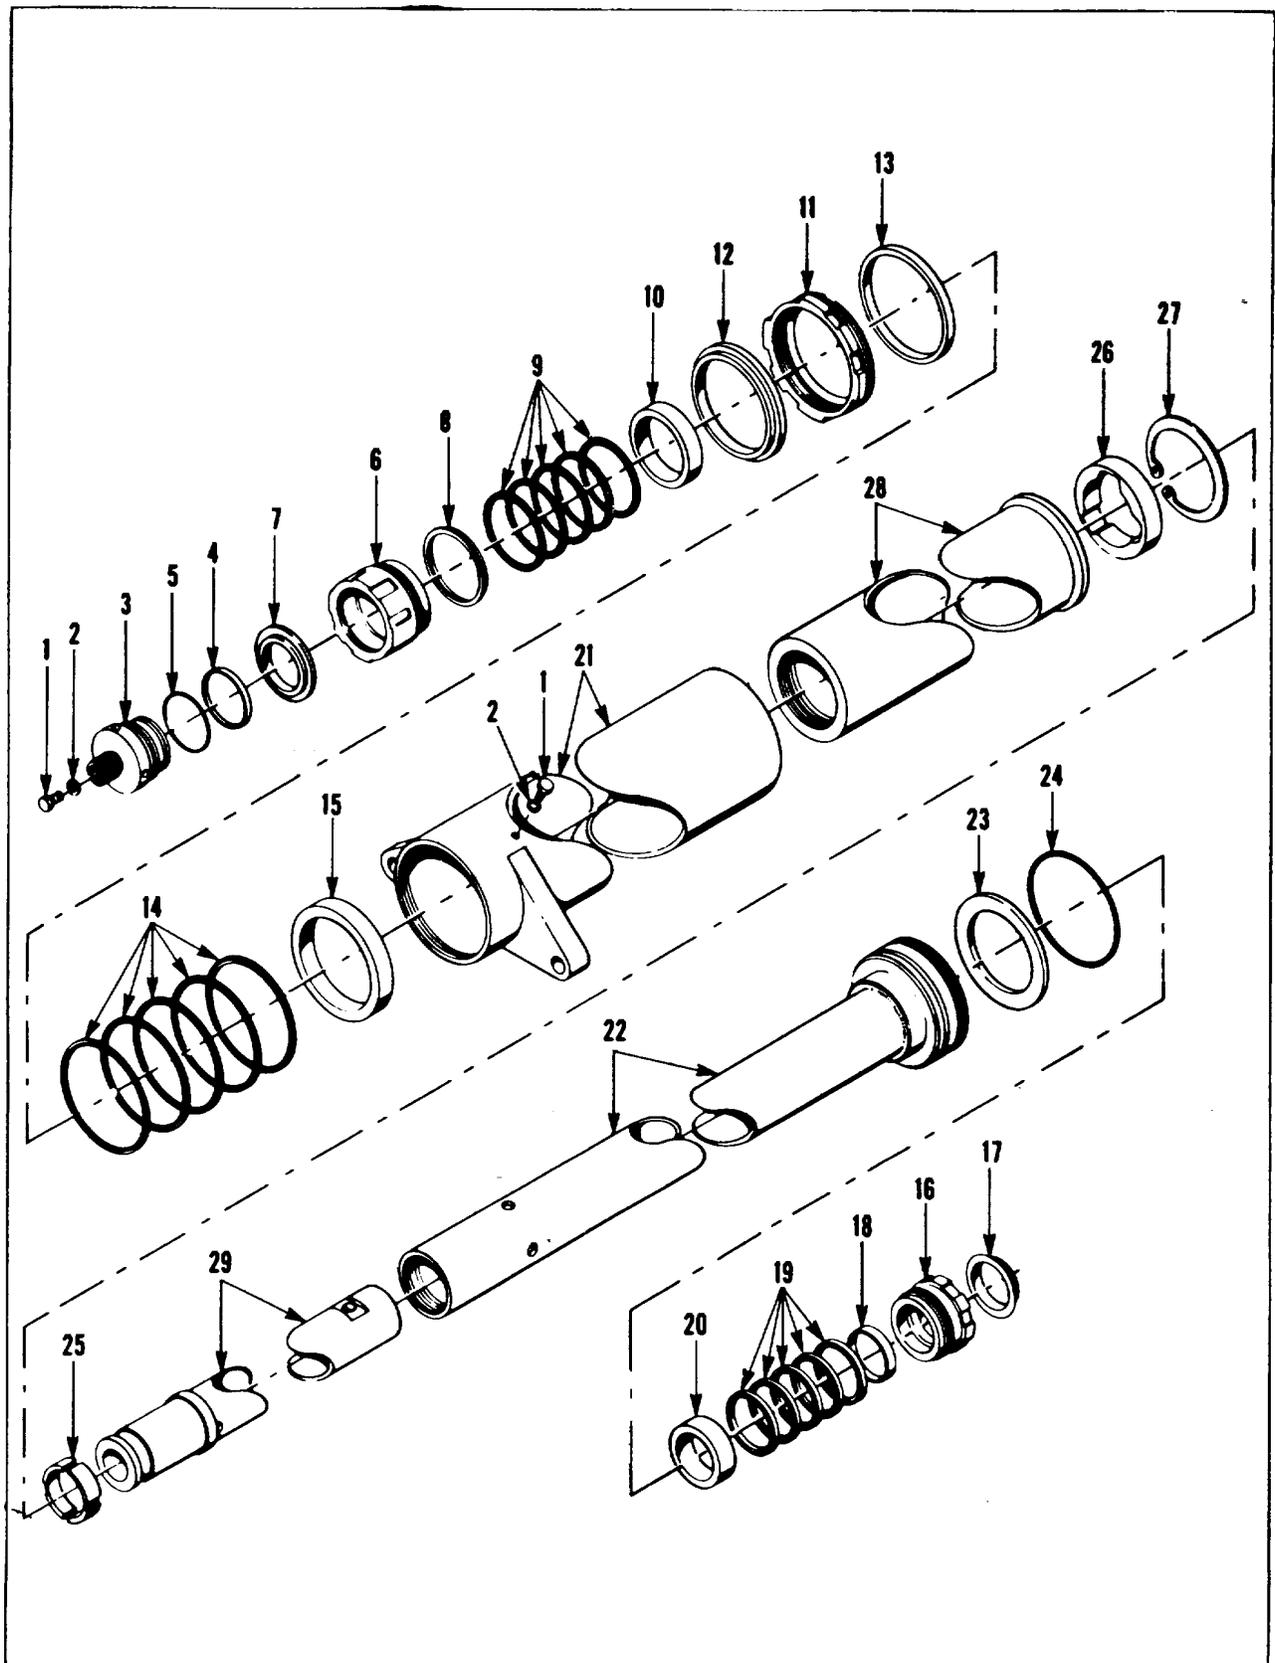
Hoist Cylinder Assembly, Actuating, Linear
